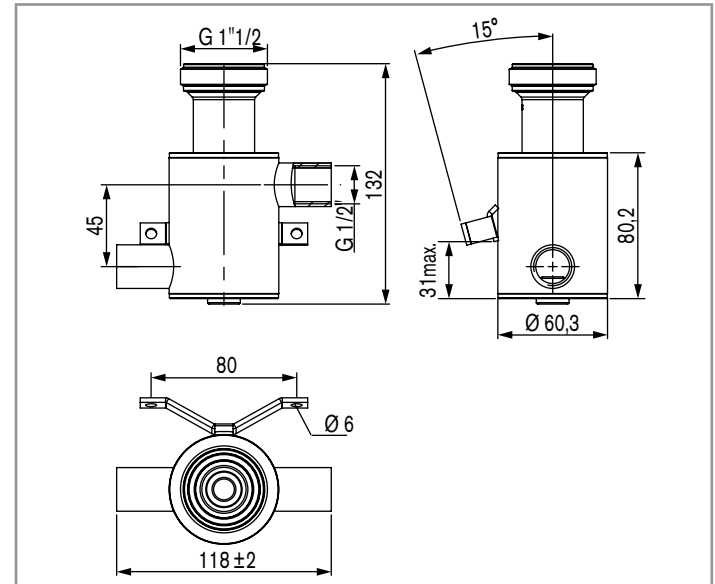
Dimensions of the measurement chamber (in mm), in stainless steel
